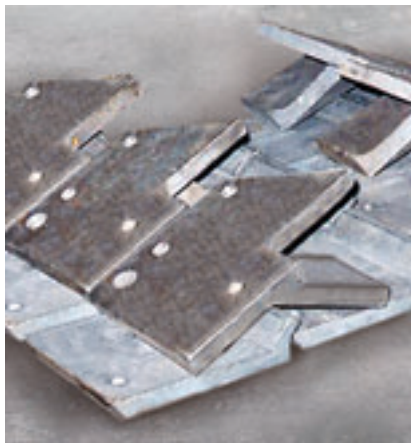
Protected grinding roller yokes in a roller mill made of KALMETALL-C 153 hard casting
